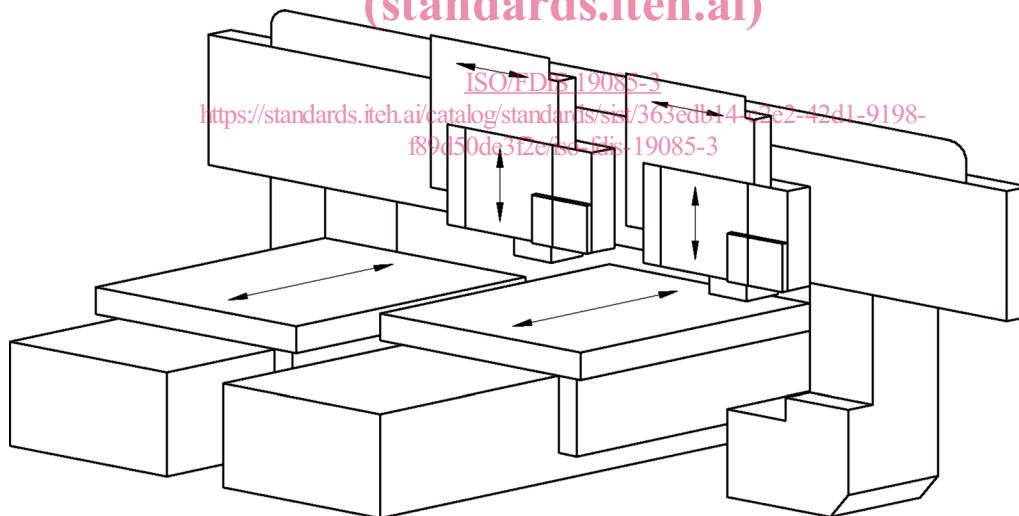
Example of portal frame machine with moving tables, fixed portal, moving machining heads
